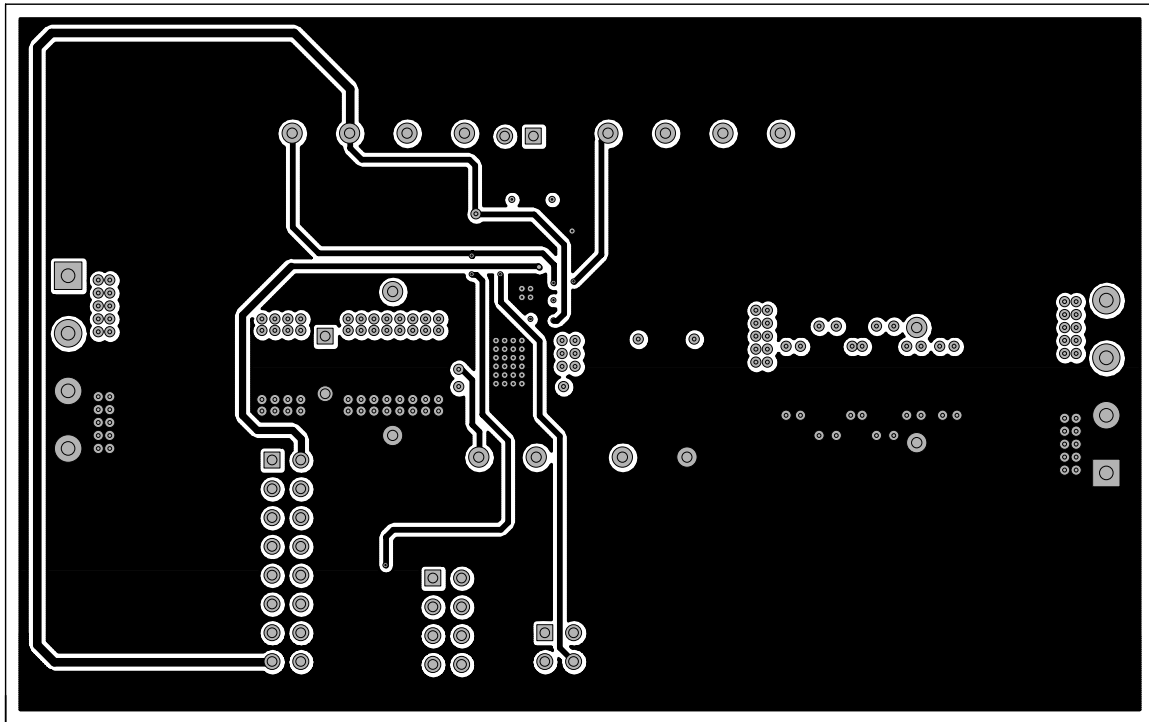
TPS53219EVM-690 Bottom Assembly Drawing (Bottom view)
